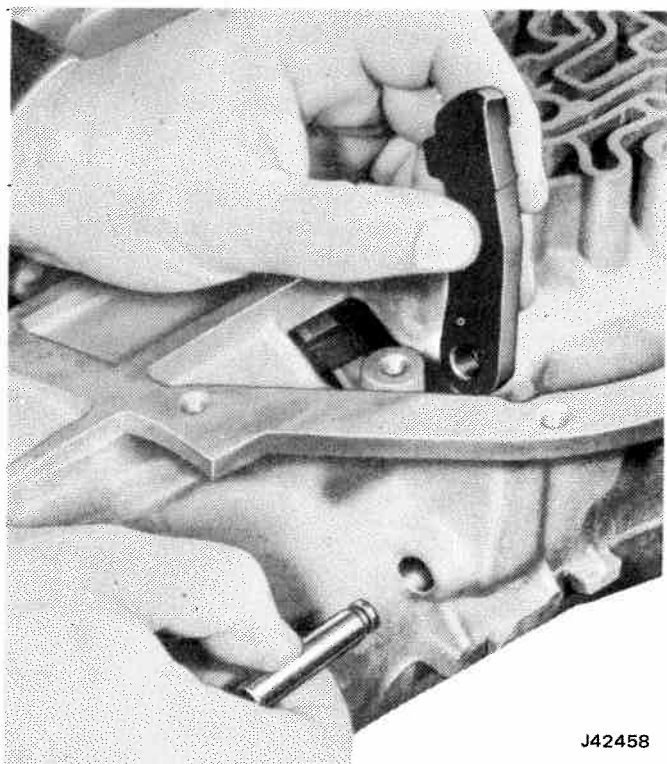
Removing-Installing Parking Brake Pawl and Pawl Shaft
